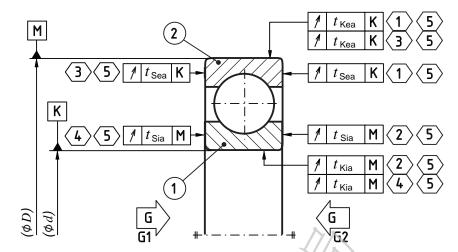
Geometrical tolerances for single components for bearing with cylindrical bore
